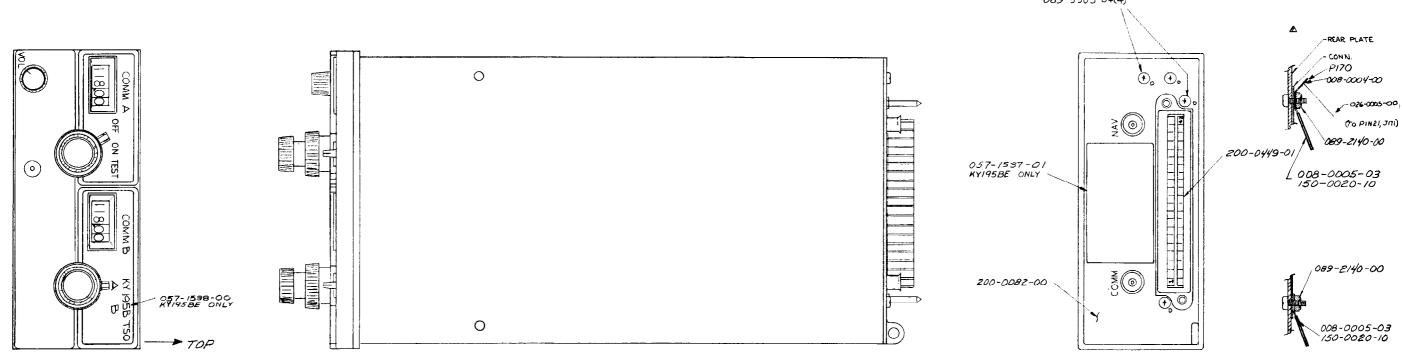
A FINAL ASSEMBLY (Dwg. No. 300-0660-00)(Sht. 2 of 2)(R-5)
